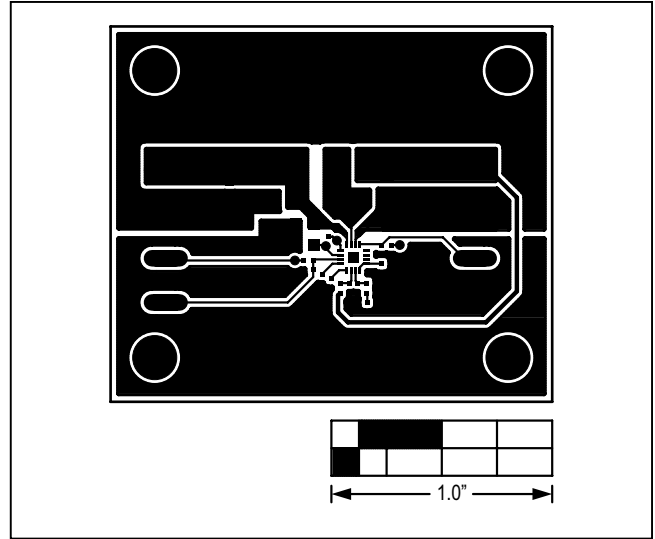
MAX17498BB EV Kit PCB Layout—Component Side
